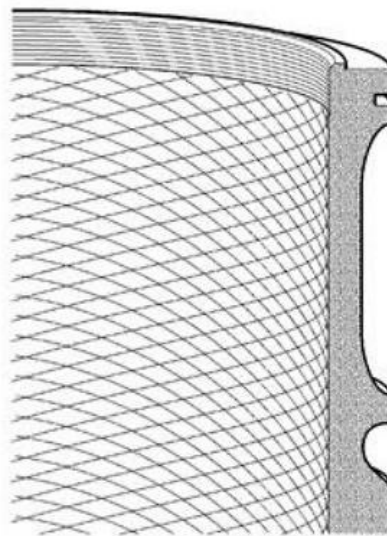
2 Section view of a cylinder liner with crosshatch pattern[9]
